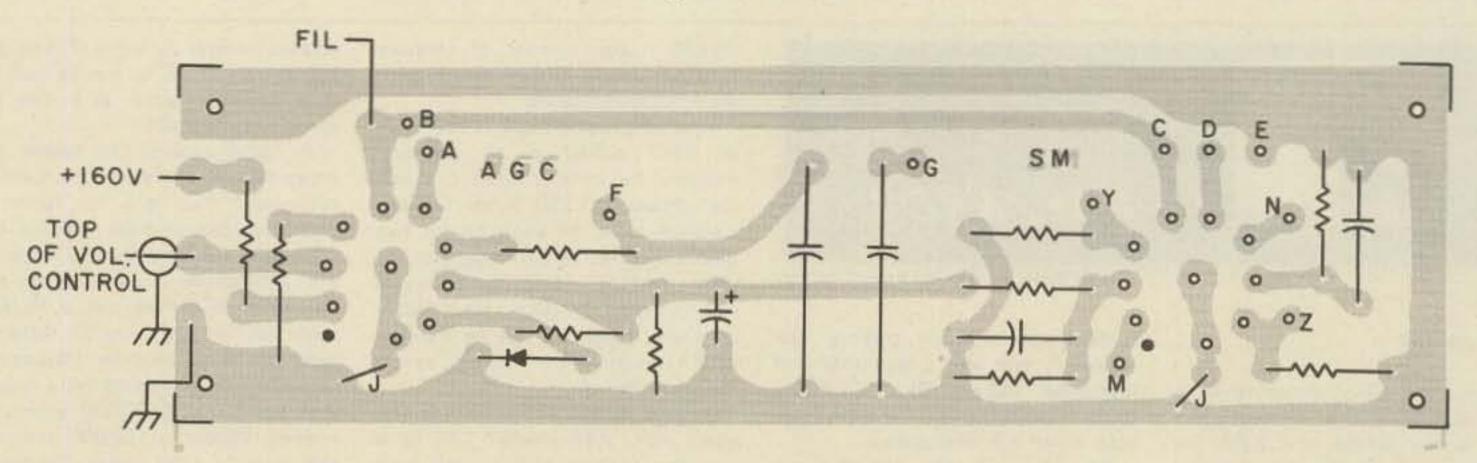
Component layout (foil side view). J used on 6.3 V models; also jumper A to B, C to D. 28 V models: Omit (2) J; Fil to A; jumper D to E.
